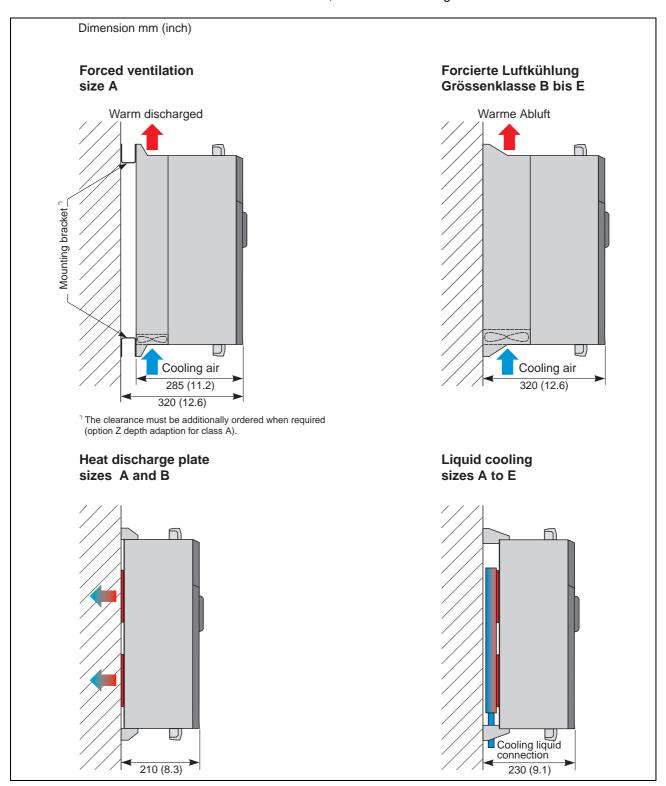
Dimension drawing side view, size class A to E with different cooling types
